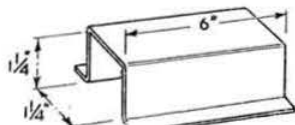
The construction of the square section line showing the flange for attaching the bottom plate.
